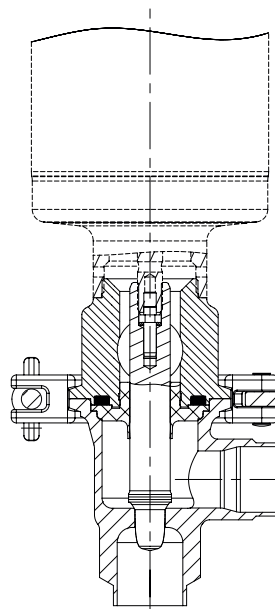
Type 3347/3379 Control Valve with welding ends
